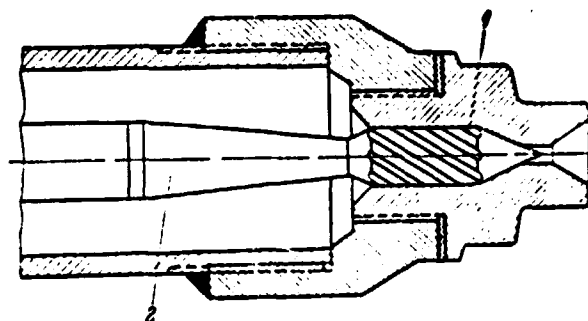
Fuel oil spray nozzle with helical atomizer (sprayer) (design of "Giprotsement" institute).
